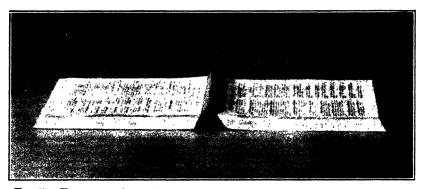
Temporary fixture for assembling two sheets of advertising material.
